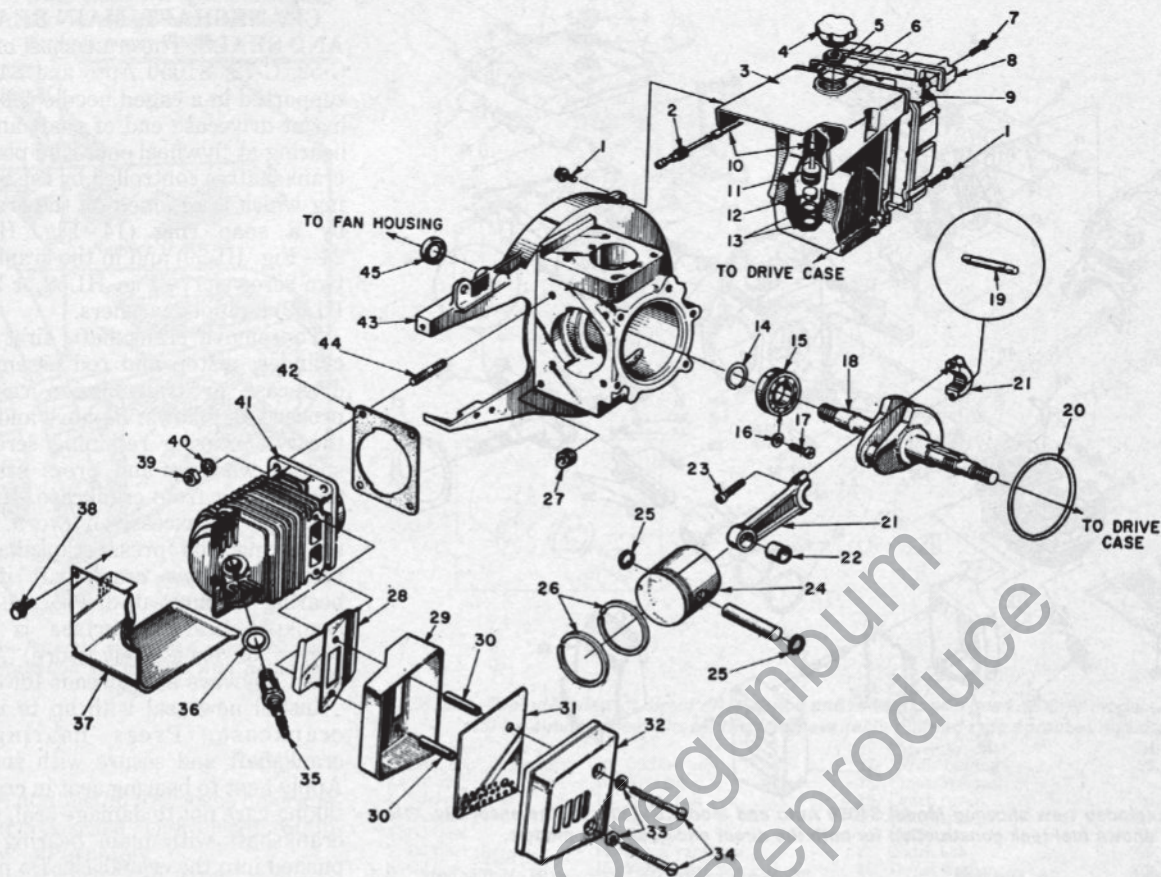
Exploded view of powerhead and fuel tank similar to Model C-52 and C-72. Gasket (9) is no longer used. Homelite cement No. 22788 is used in place of gasket to seal between tank and cover.
